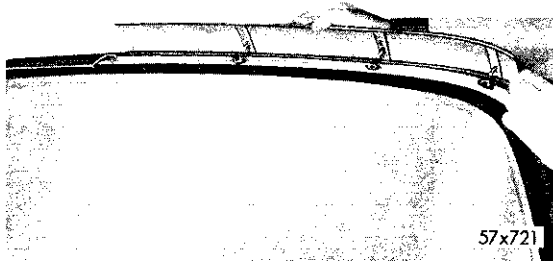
Removing or Installing Upper Windshield Moulding (Imperial Models)
